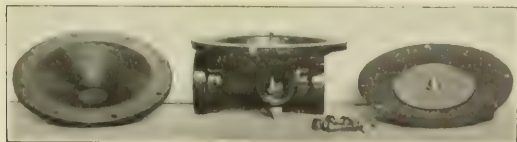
AIR PRESSURE REGULATOR PARTLY ASSEMBLED, SHOWING AT THE CENTER CONNECTING ROD AND CRANK FOR ACTUATING THE DAMPER BY THE DIAPHRAGM MOVEMENT
